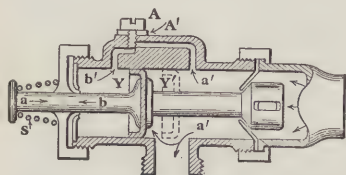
PRINCIPLE OF "TIME-CLOSING" VALVE
